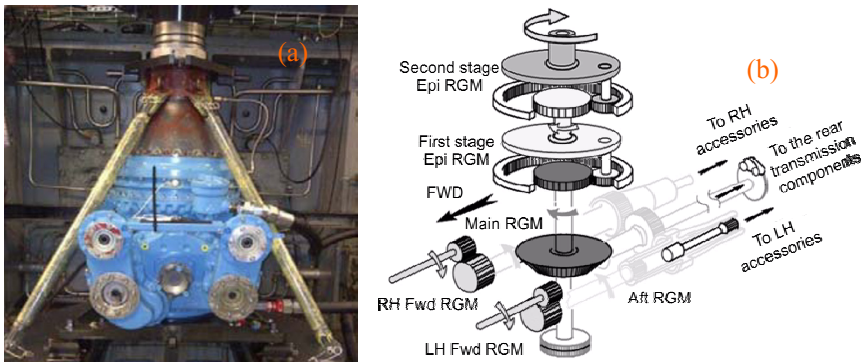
(a) MGB mounted on test bench; (b) The sketch of helicopter MGB internal parts
